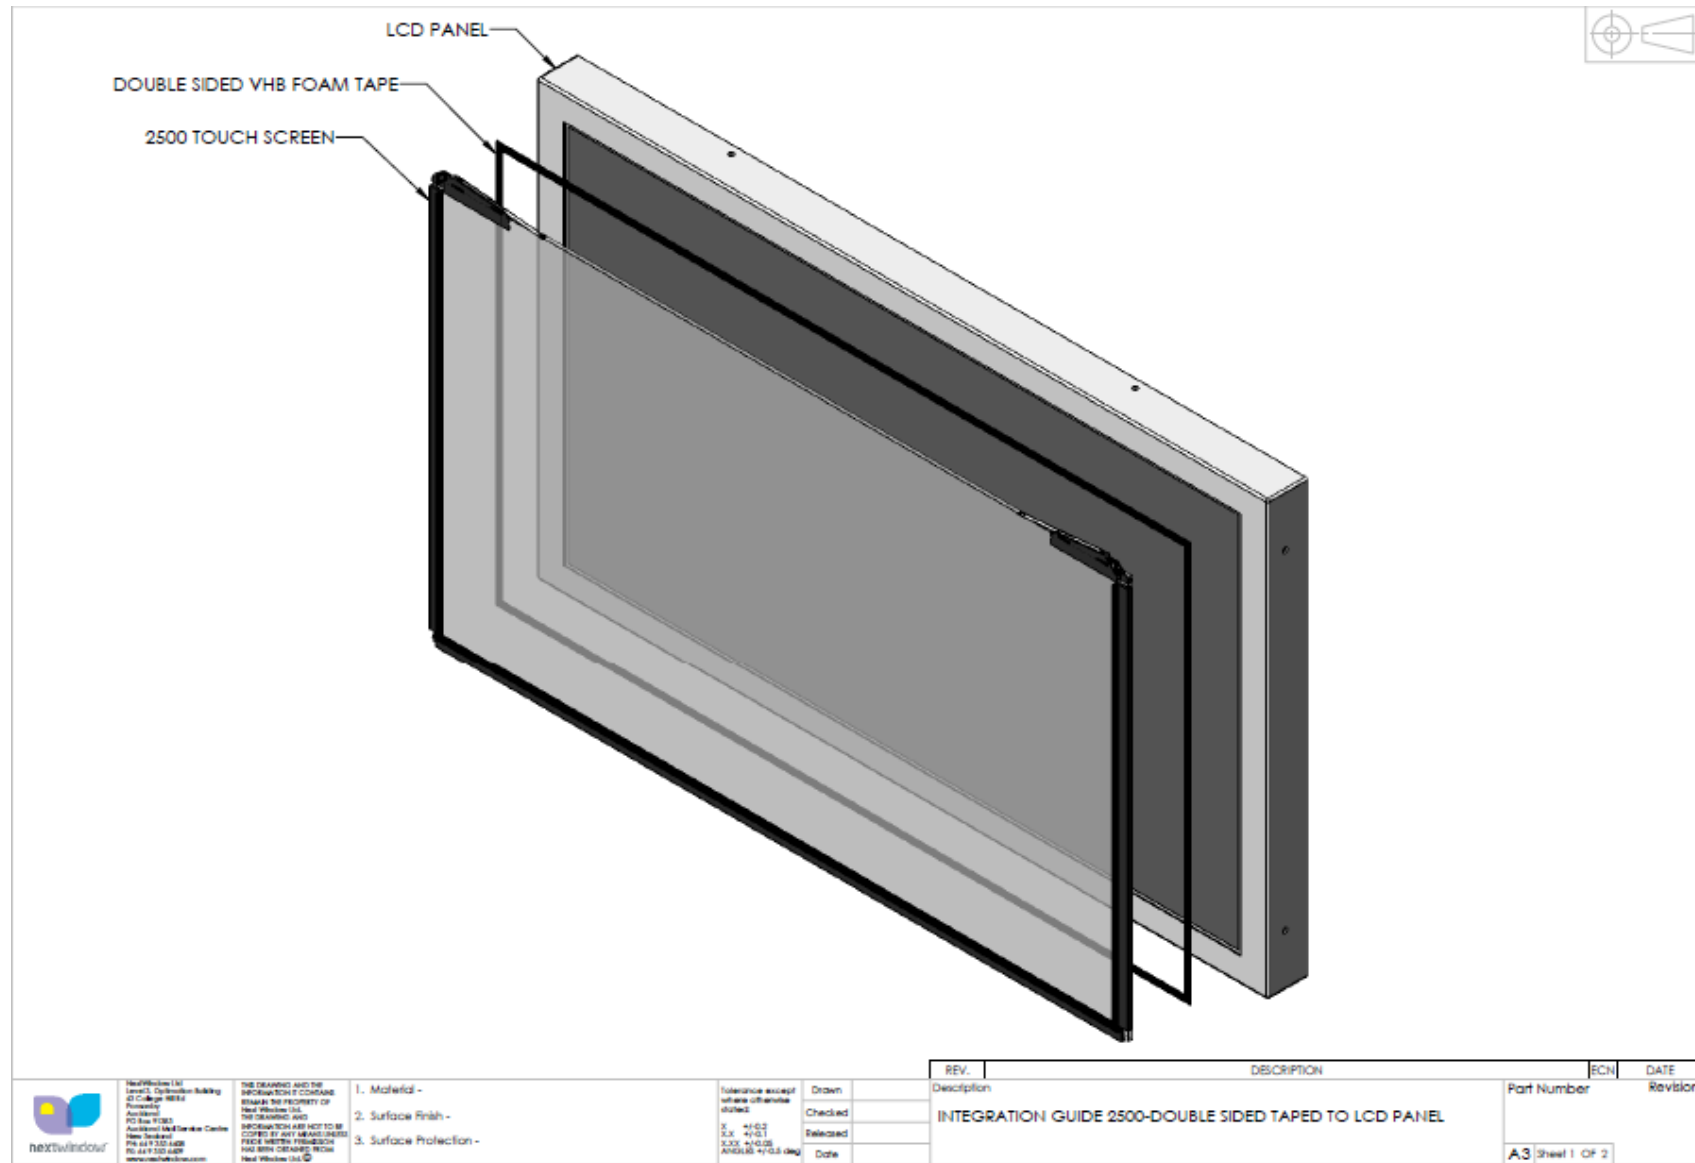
Exploded view - 2500 touch screen, double sided tape and display panel.
